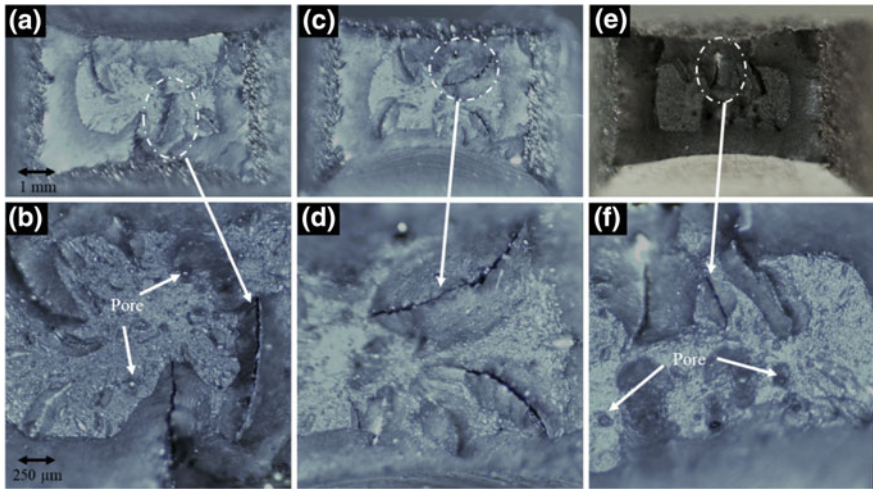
Overall and magnified views of the tensile fracture surface of as-printed specimens a, b specimen 1, c, d specimen 2, and e, f specimen 3
